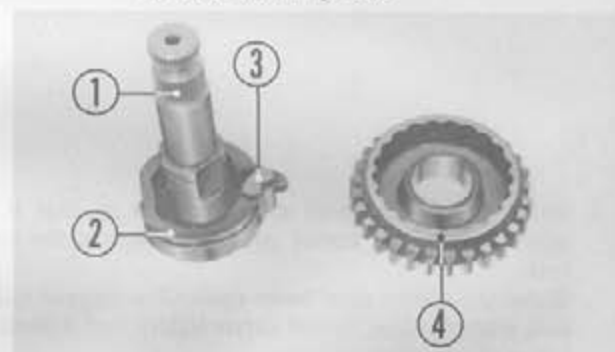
① Kick starter spindle ④ Kick starter pinion
